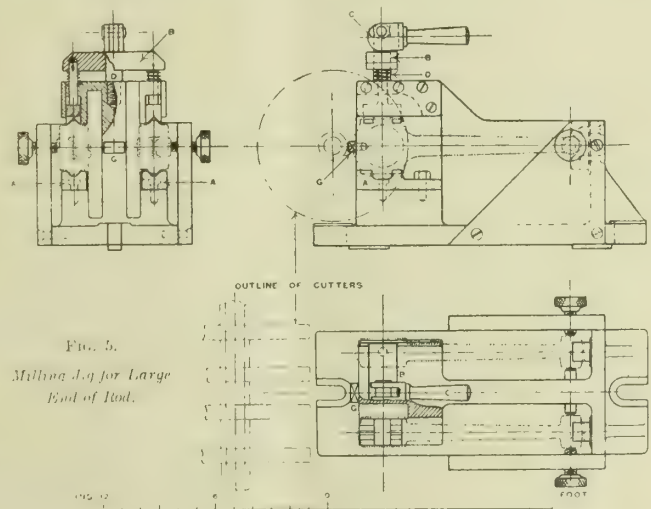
MILLING JIG FOR LARGE END OF ROD.
